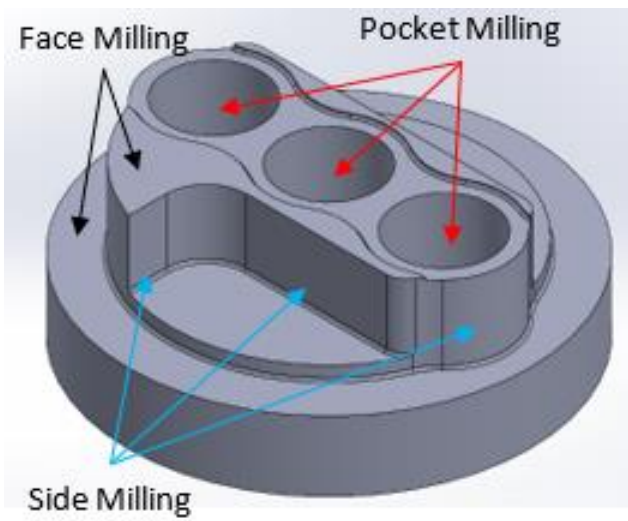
Workpiece to be machined in Super duplex SAF 2507
